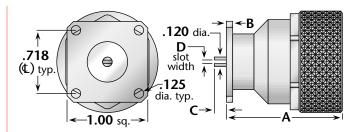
(1" square flange, interchangeable with type N standard flange size)
